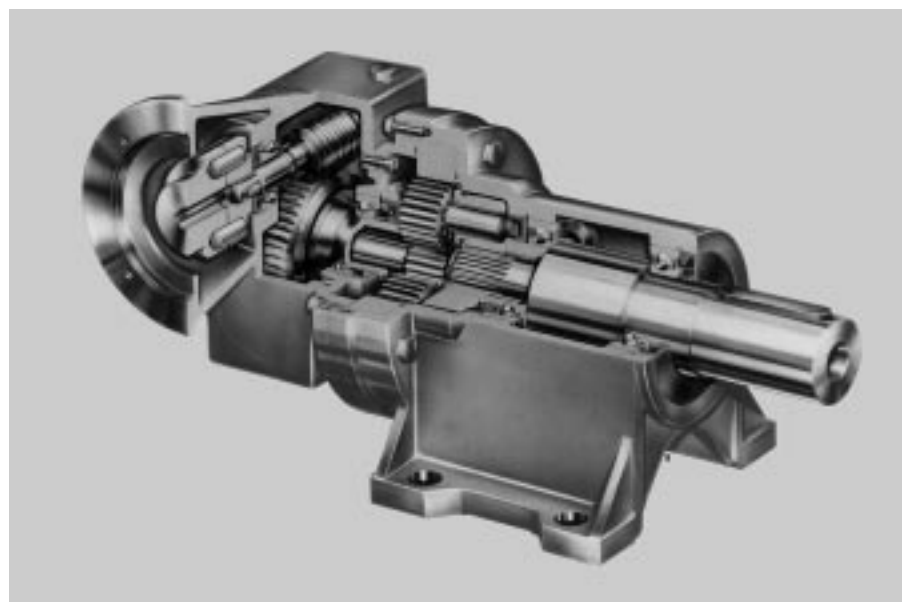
Planetary worm gear, Rhein-Getriebe GmbH, D-40667 Meerbusch, Germany F 10242
